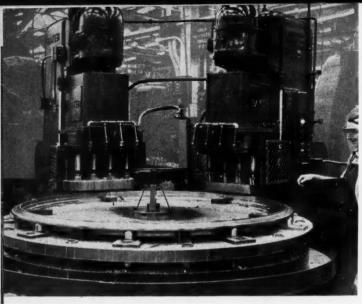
Drilling and Countersinking Hole in a Turret Ring, Ui ing a Rotating Table and Double Bake Bros. Drill
